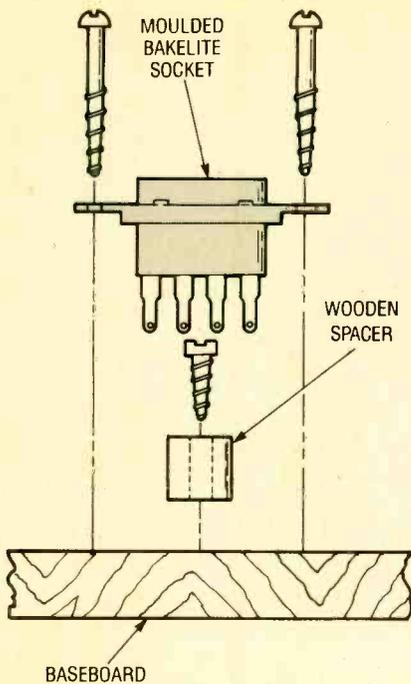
Once the wiring outlined in Fig. 3 is complete, prepare the baseboard to accept the tube socket. The socket rests atop a 1/2-inch length of 3/8-inch diameter hardwood dowel.
